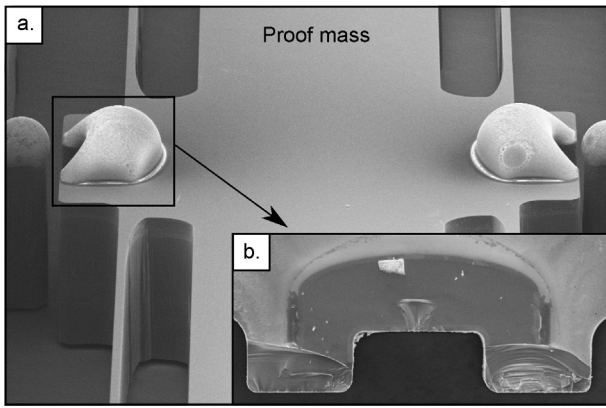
(a) Bumpers created through the reflow of solder on metal pads (before shock testing), (b) solder bumper failed at the pad–wafer interface during a shock event. The damage at the silicon bumper tips occurred during rebound after the solder bumper de-adhered and was no longer available to protect the silicon.
